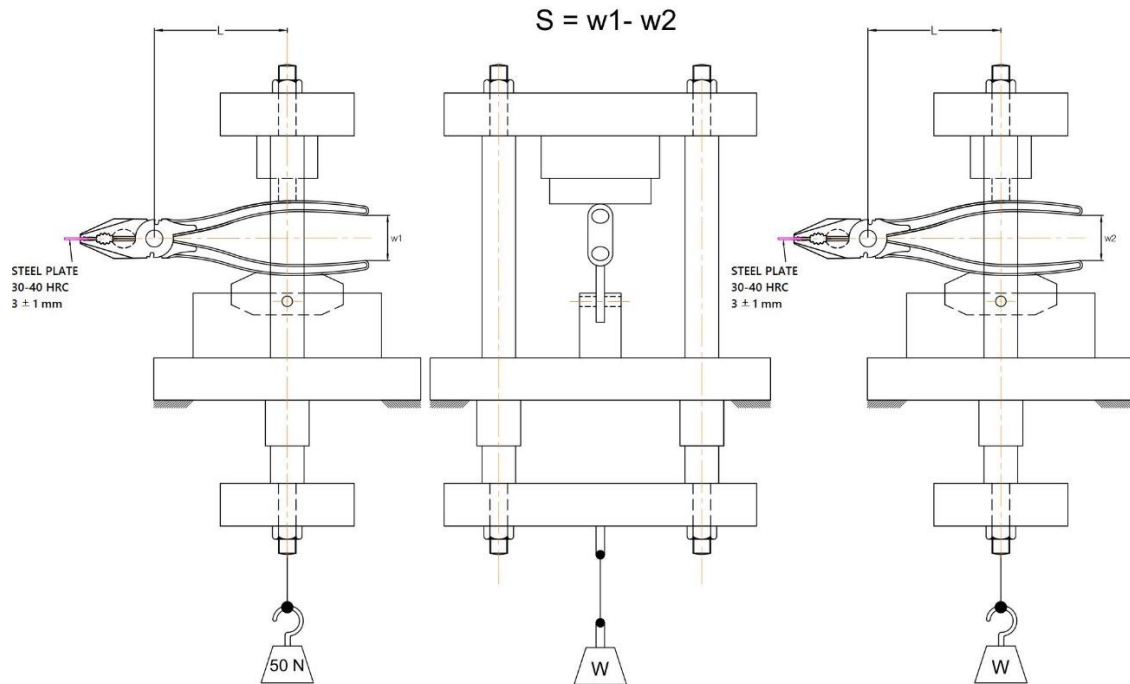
TEST ARRANGEMENT FOR HANDLE LOAD TEST FOR COMBINATION SIDE CUTTING PLIER
